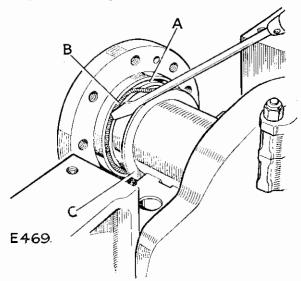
Fitting garter spring to oil seat recess A—Oil seal recess. B—Garter spring. C—Thrower flange
